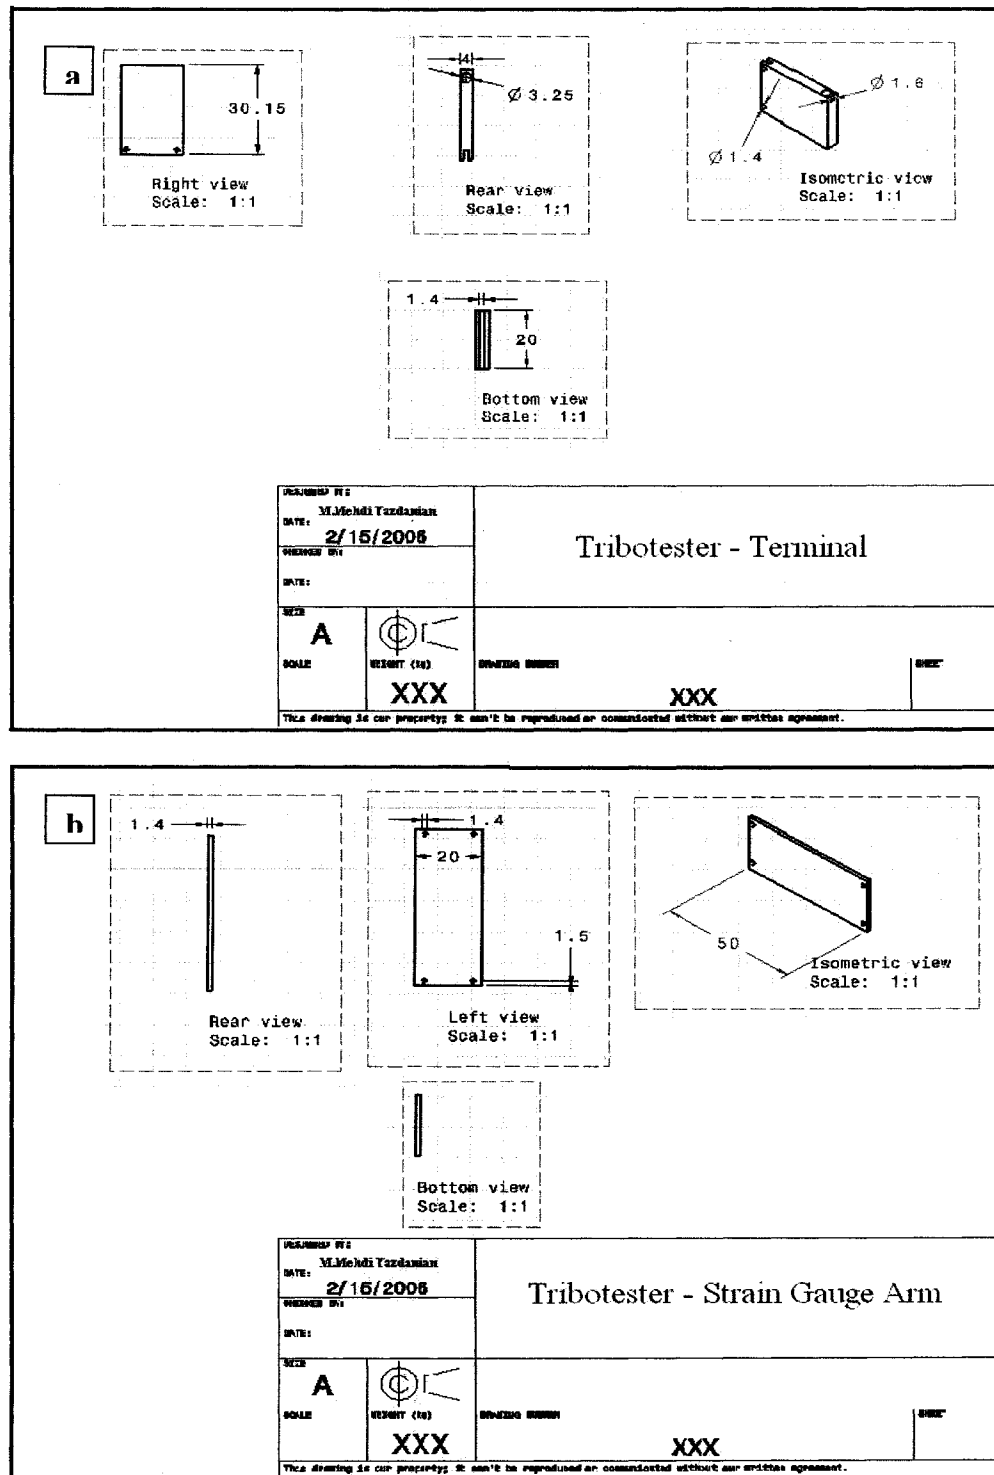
Tribotester part: Disk Holder (a) terminal, (b) strain gauge arm (sizes are in mm).
